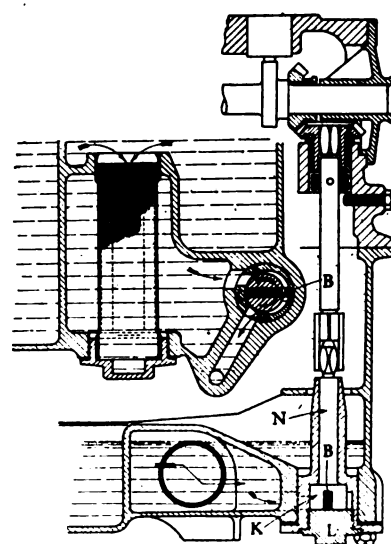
Sections through oil vane-type pump, showing driving mechanism, strainer, etc.
